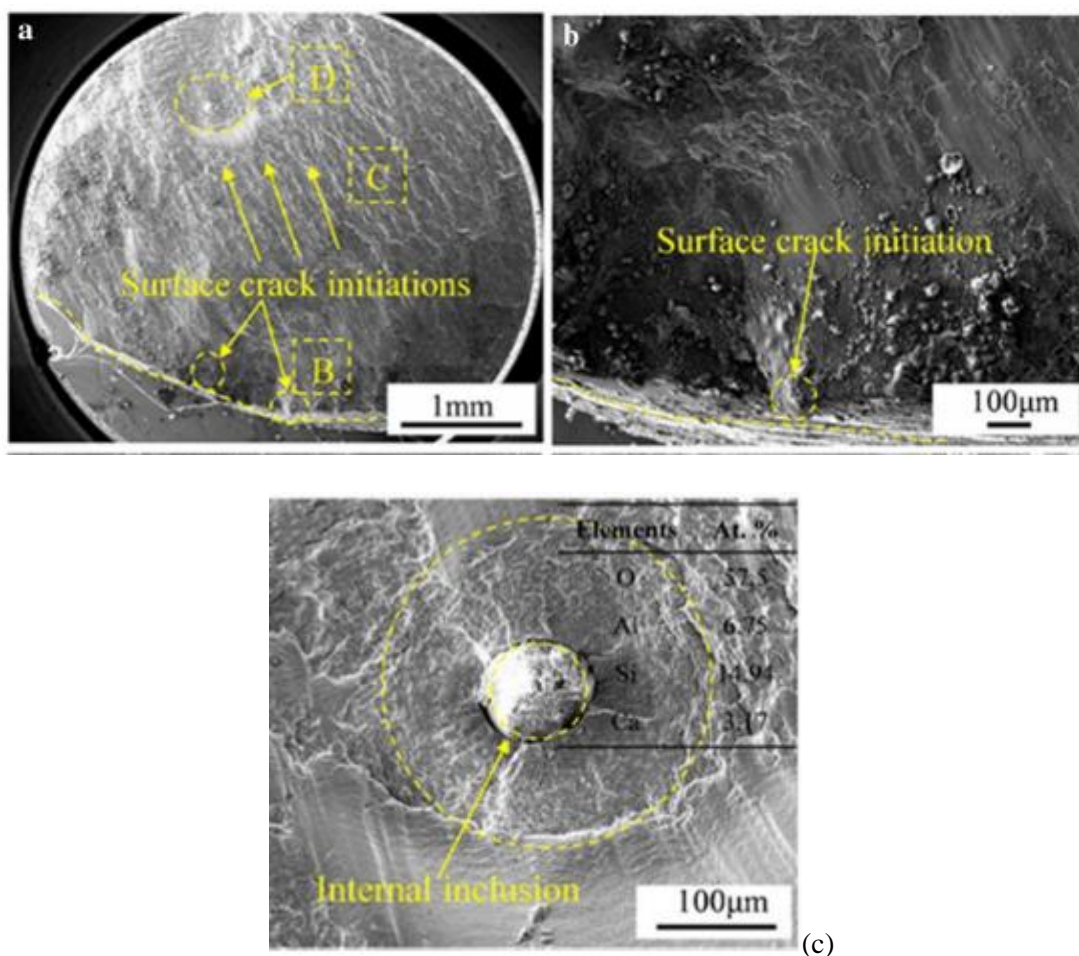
Fracture morphology of the specimen failed at WM at room temperature: the overall morphology of fracture surface, b magnified micrograph of one surface crack initiation, c internal inclusion in the final fracture zone [56]
